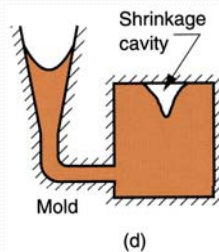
Some common defects in castings: (d) shrinkage cavity
